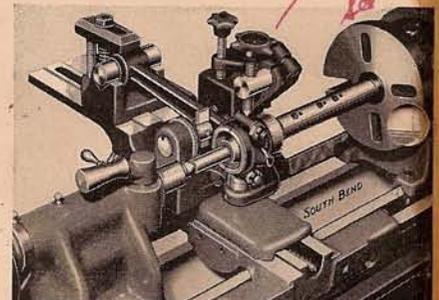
Boring a Rebabbed Connecting Rod in the Lathe.
